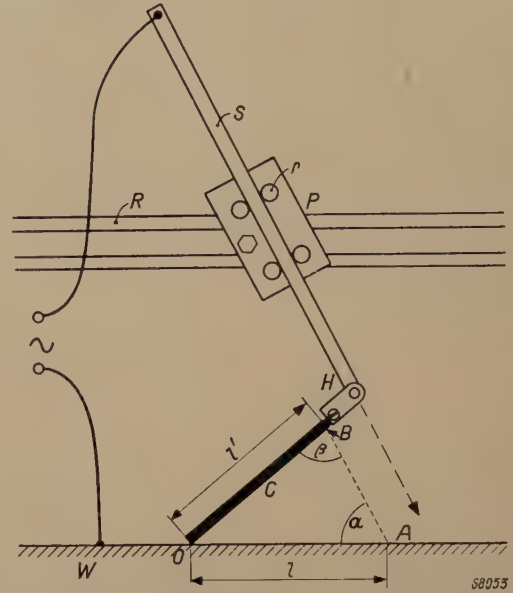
Set-up for automatic forward travel (for touch-welding). *C* the Contact welding electrode fixed with adjustable clamp *H* to the guided bar *S*. The bar is guided by four insulating, grooved rollers *r* and by its weight keeps the tip of the electrode pressed against the workpiece *W*. As the electrode melts down it travels parallel to itself. The mounting plate *P*, carrying the rollers *r*, can be fixed to the rail *R* at any desired angle.
